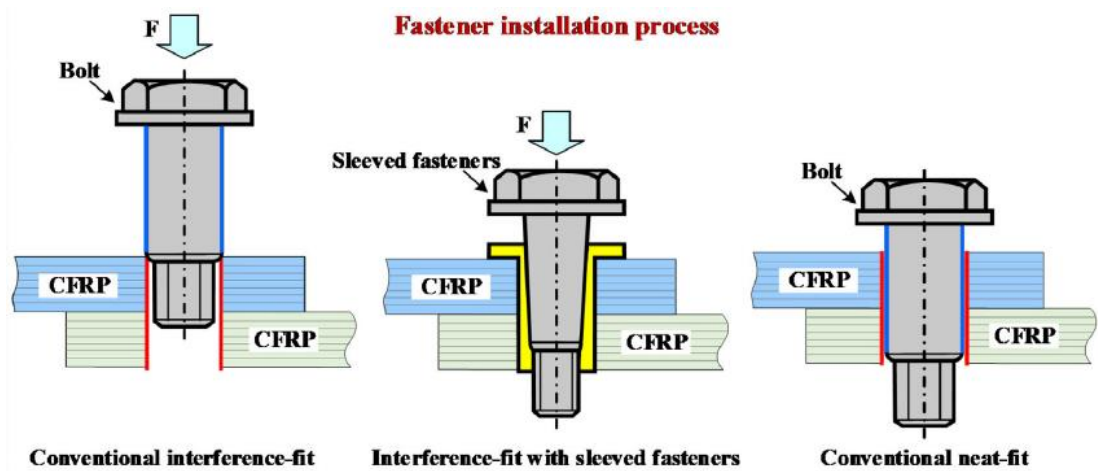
Sleeved bolted joint assembly process for single-lap composites (Xu et al., 2022)
